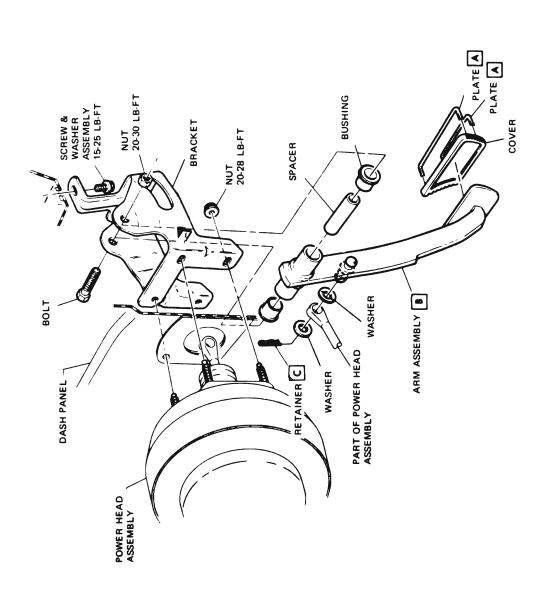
D-15 Brake Pedal Mounting - B-C-E Car
